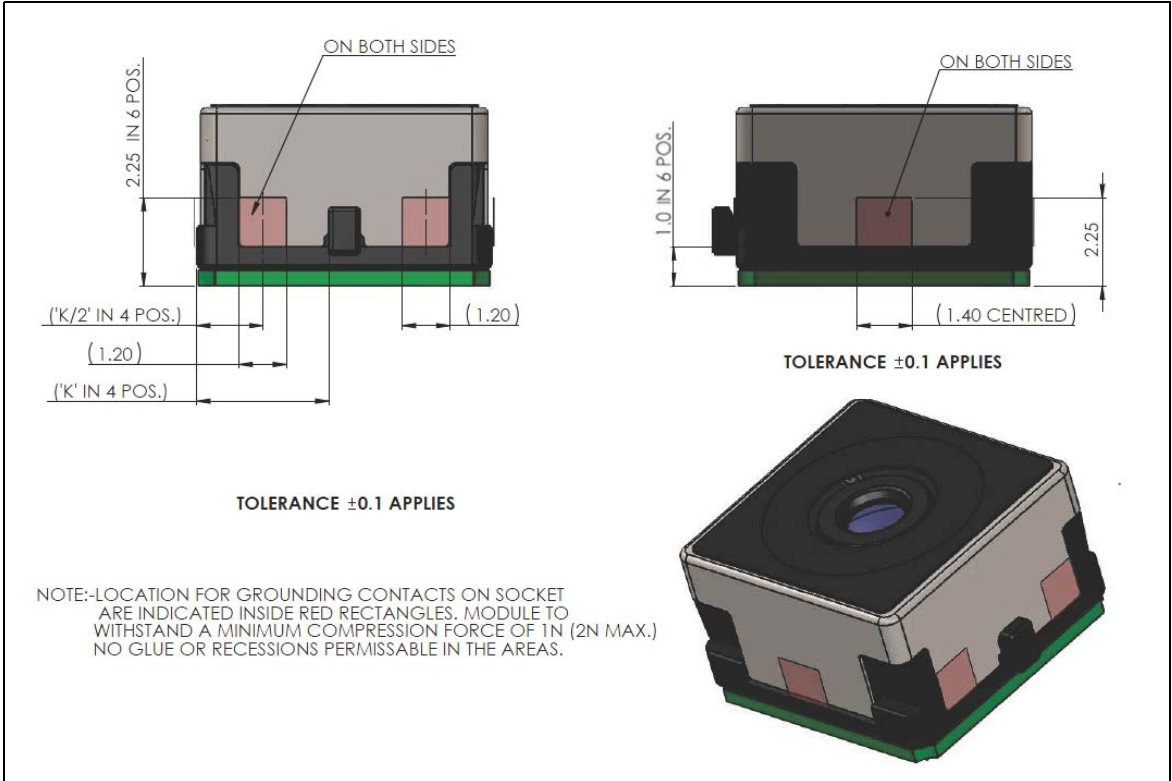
VB6955CM outline drawing in mm - sheet 5 of 6
